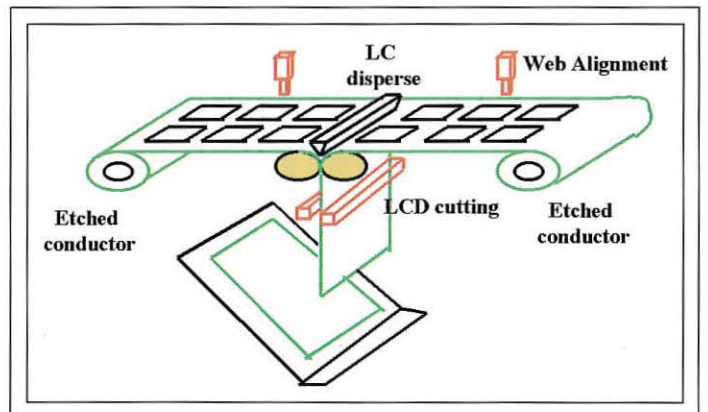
Reflective or transmissive flat panels can be produced at low cost using roll-to-roll assembly processes.
